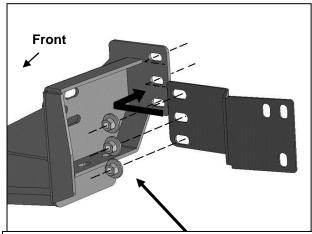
Remove bumper brackets from ends of aluminum impact bumper
